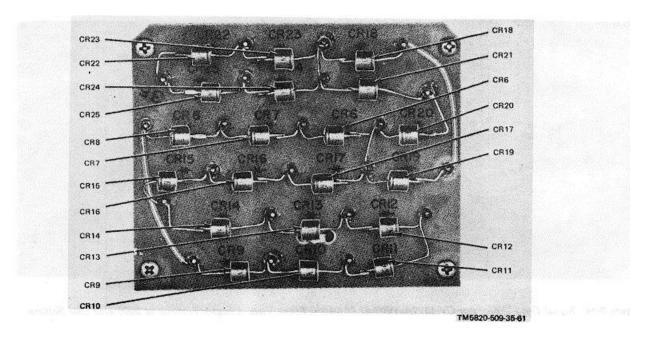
Power Supply PP-3581/PRC-47 (A8A5), Subassembly no. 1, Front View
